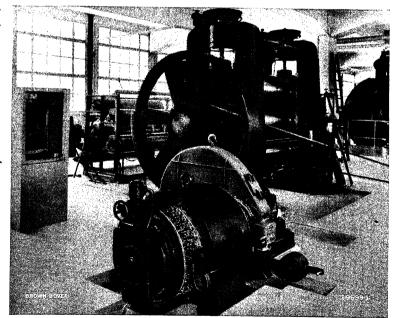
Drive of a rubber calender by a 60-kW three-phase shunt commutator motor, with speed regulation in a range of 970 to 127 r. p. m.
